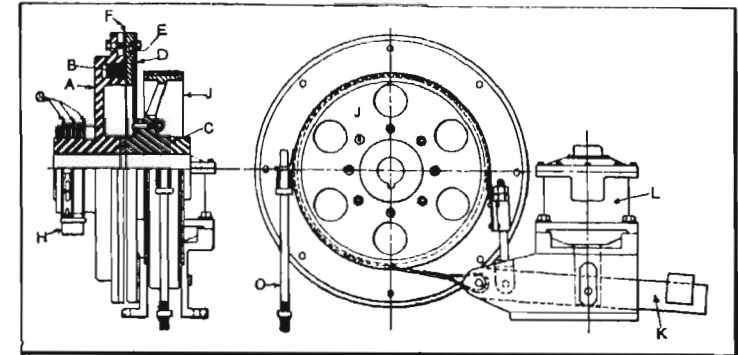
Magnetic Clutch Equipped with Automatic Band Brake which Operates when Clutch Releases
